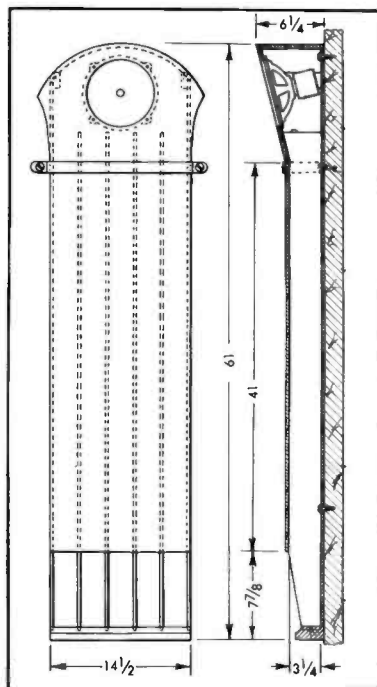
Outline and sectional drawings to show dimensions of enclosure. Partitions are 3/8-in. Celotex or similar soft-board.
